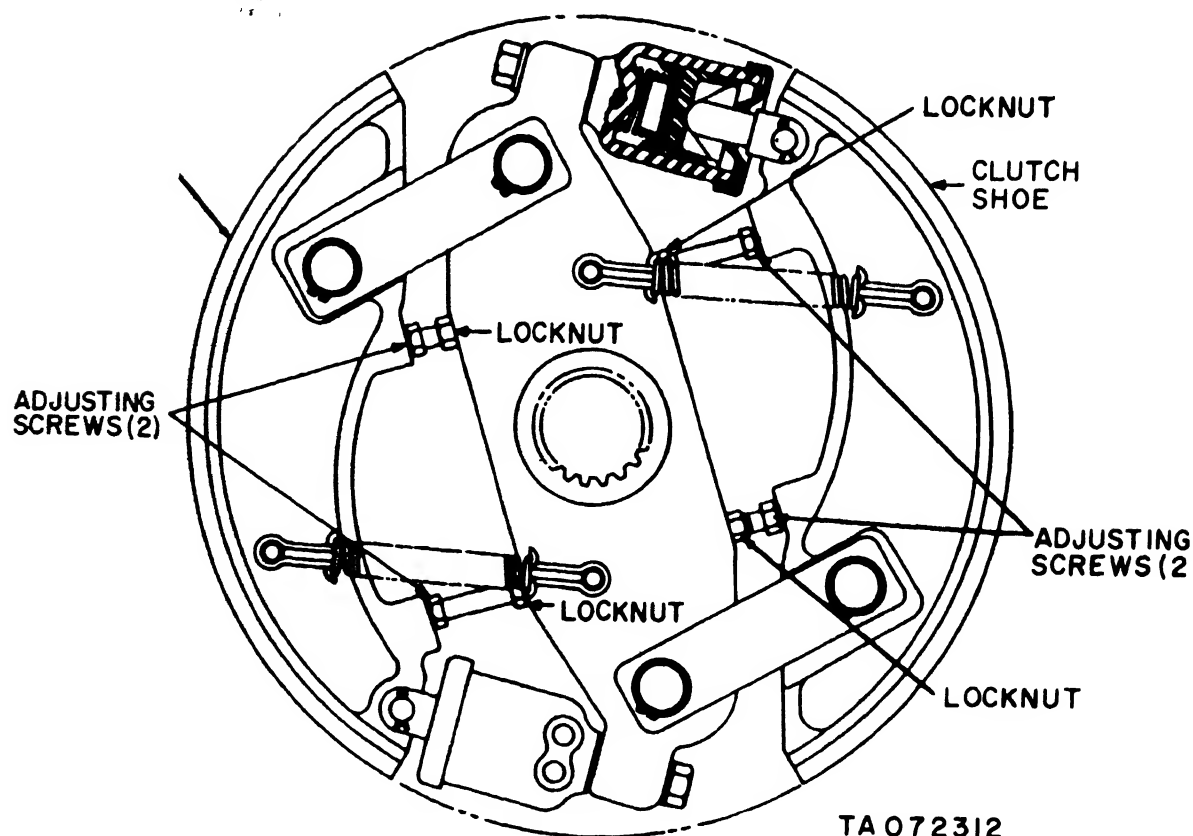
Adjusting reversing shaft clutch or horizontal swing shaft clutch.
